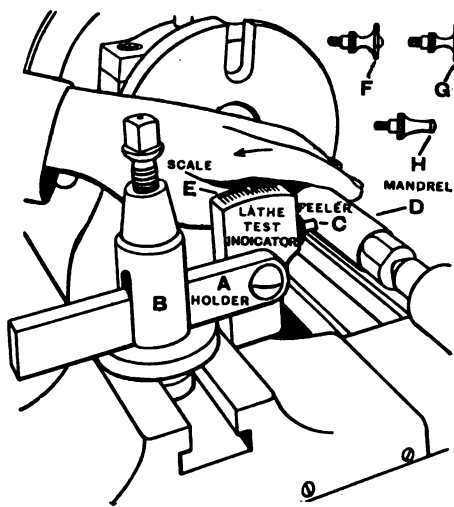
TESTING THE TRUTH OF A MANDREL WITH A LATHE TEST INDICATOR.
